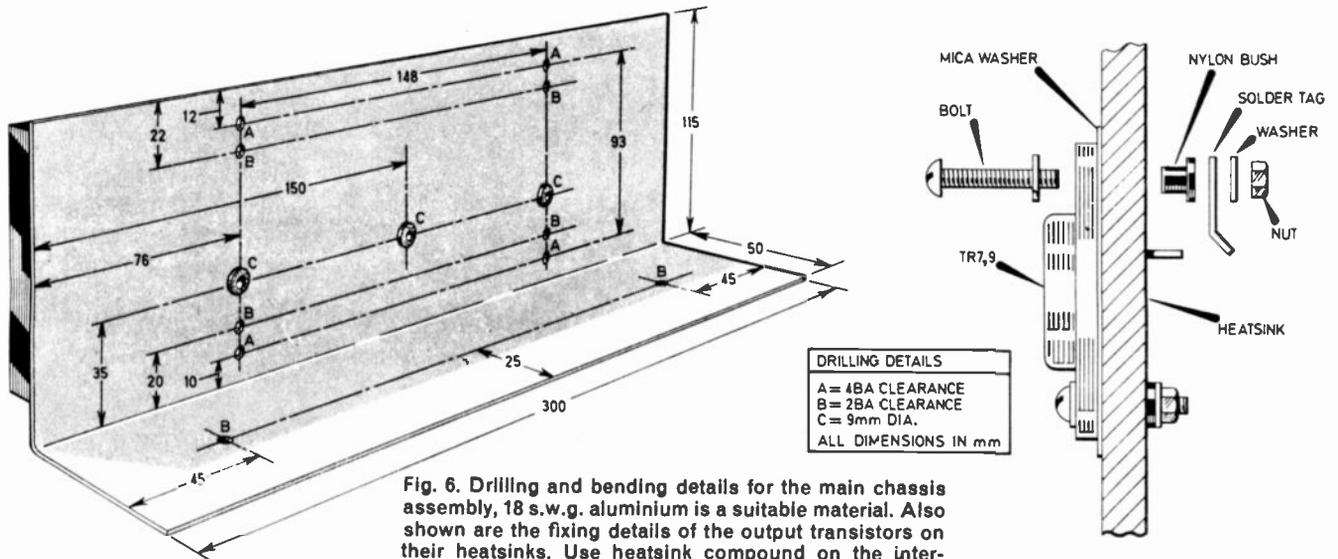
Drilling and bending details for the main chassis assembly, 18 s.w.g. aluminium is a suitable material. Also shown are the fixing details of the output transistors on their heatsinks. Use heatsink compound on the interfaces for good thermal contact.
